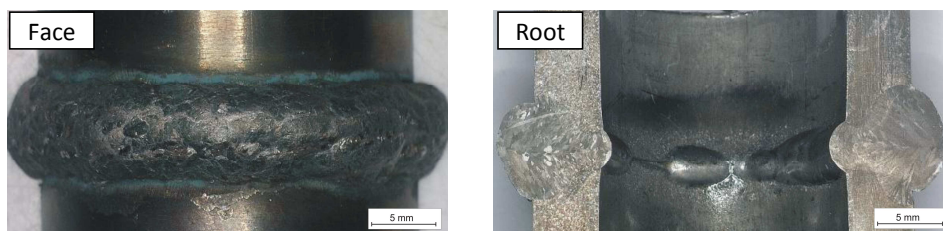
Face and root of a fusion weld made with the combined method: remelting - disc laser and filling and face - laser + MAG hybrid, of a tube made of DMV 617 mod alloy
